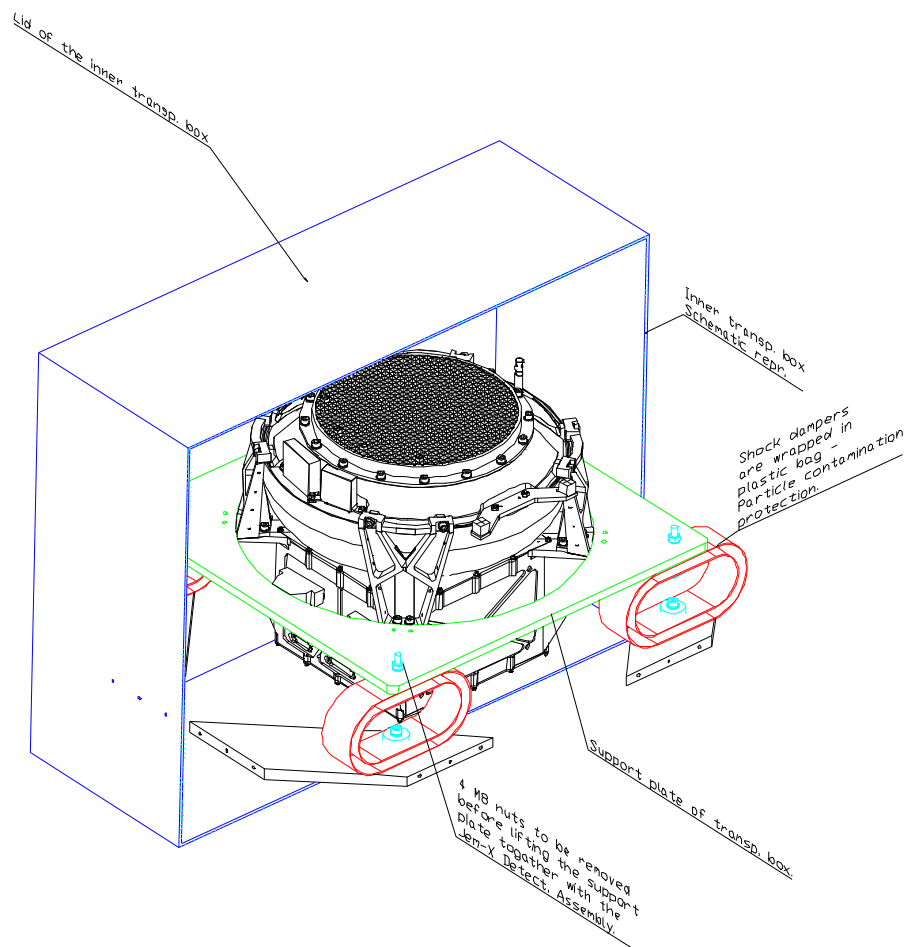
The layout of the inner box with the Jem-X Detector Assembly positioned with its X-axis pointing upwards.
